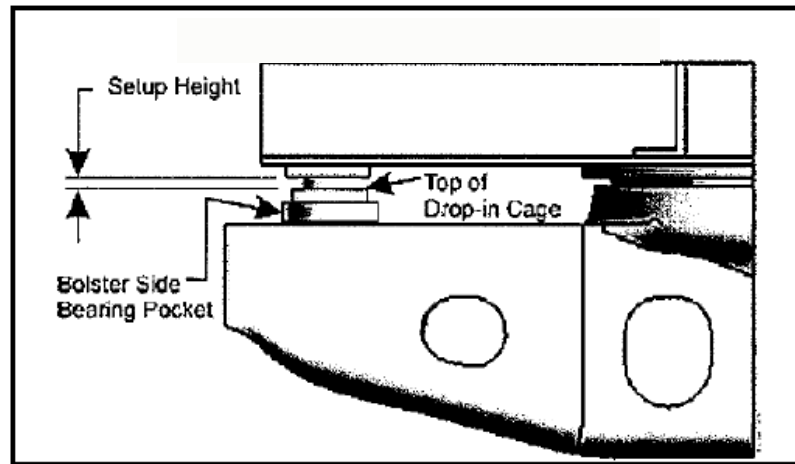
Measurement of constant contact side bearing on cars with low profile or standard height solid block style side bearing pocket
